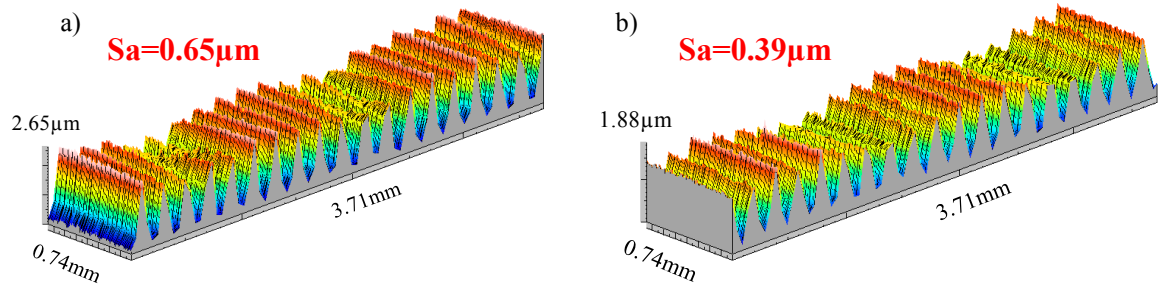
Workpiece surface topography produced with (a) new and (b) worn tools in Test 3
